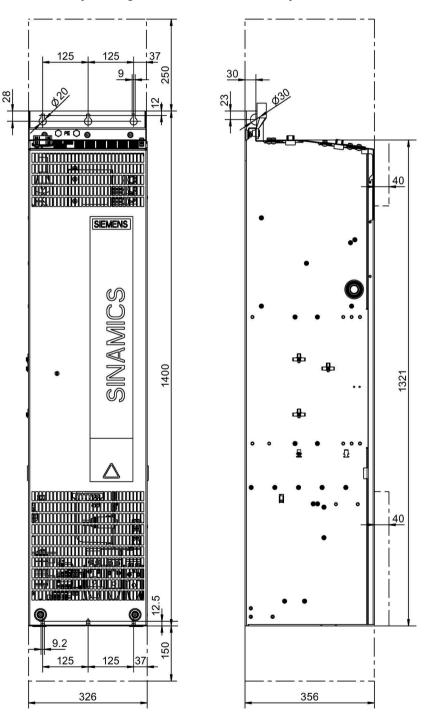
Dimension drawing Active Line Module, frame size FX Front view, side view
